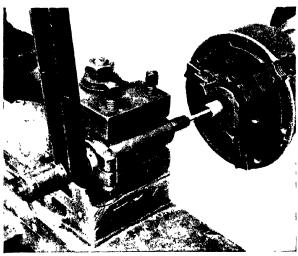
Internal grinding using attachment belt driven from countershaft
